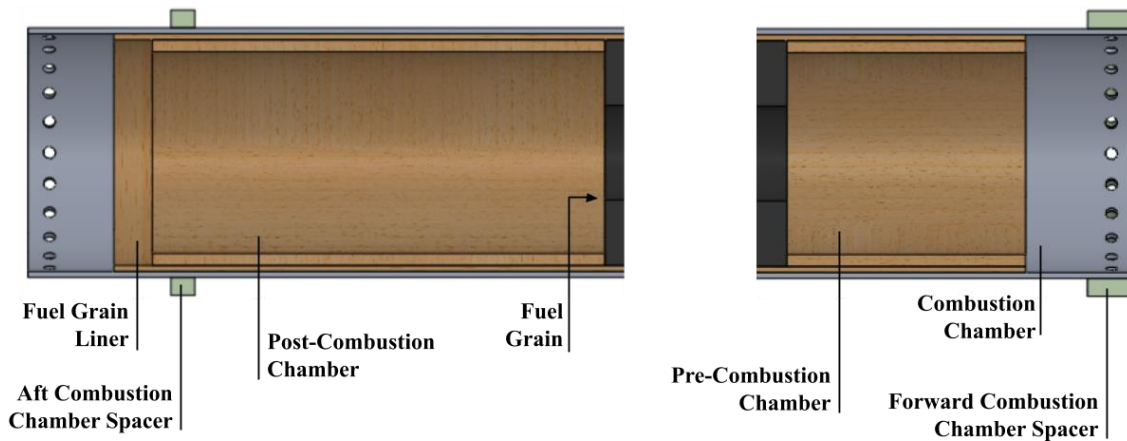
Combustion chamber assembly, aftside on the left (cross-section view, labeled)
